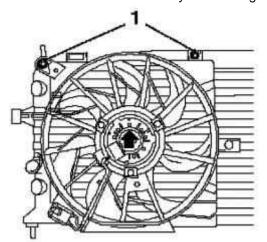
Mounting the fan: 1 - bolts fastening
